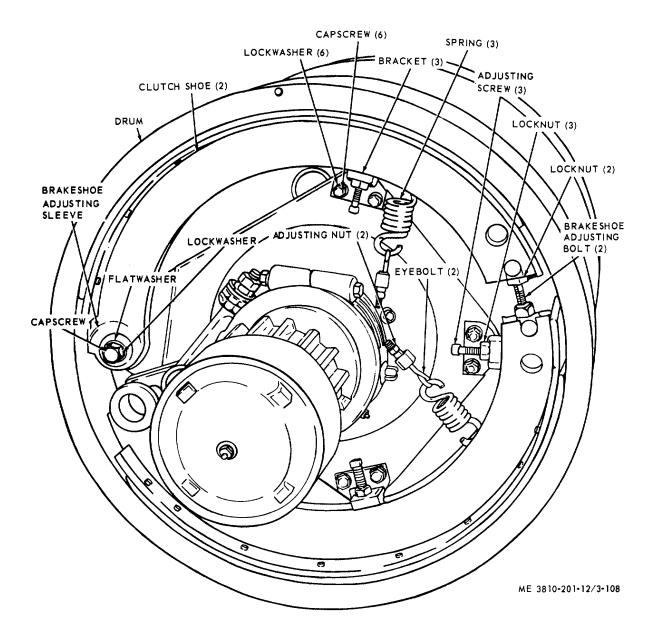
Jackshaft clutch shoes, removal and installation.
